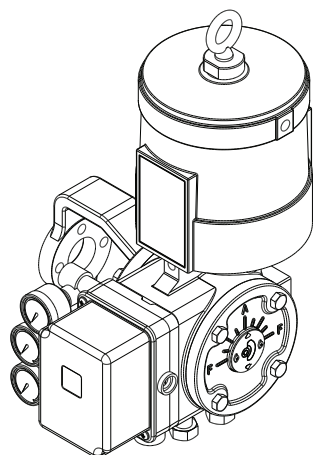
Assembly of Valtek HPP2000 Positioner in the Rotary Actuator
